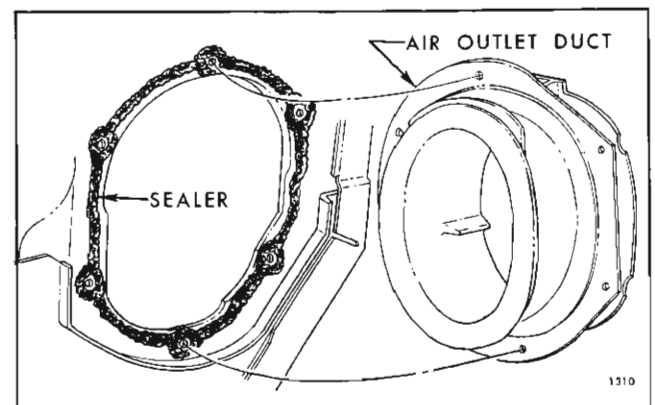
C17—Shroud Side Air Outlet Duct Sealing
